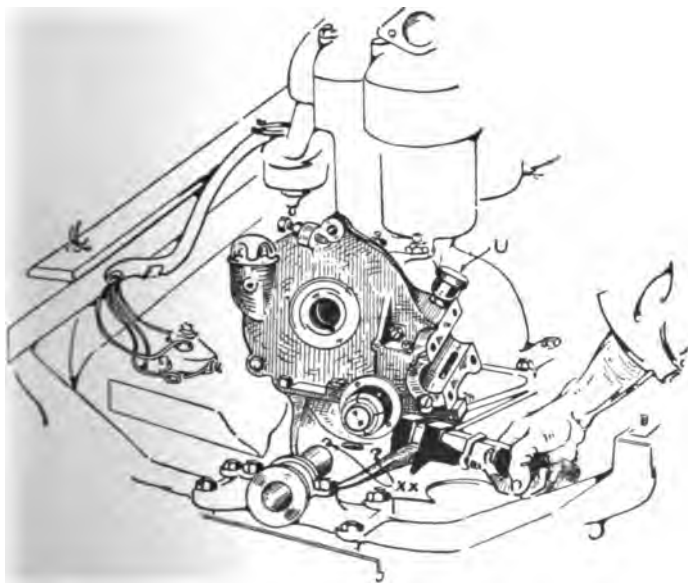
Bending the nose pan to provide the clearance necessary for the gear ring
